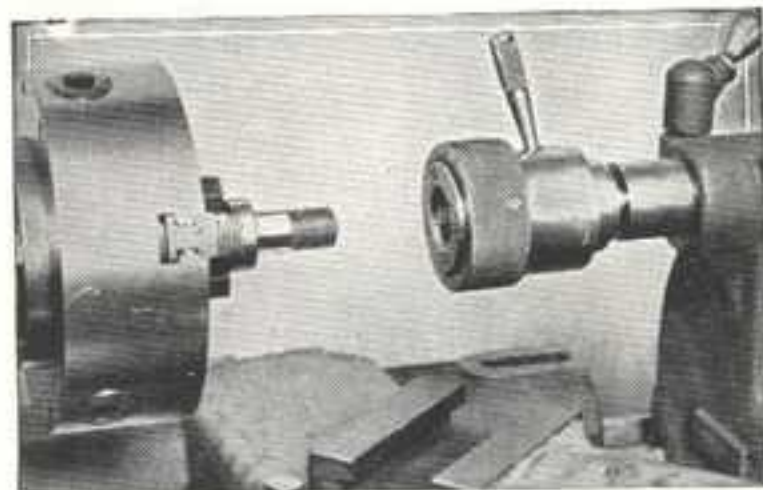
Die Mounted in Tailstock of Lathe for Threading Studs
